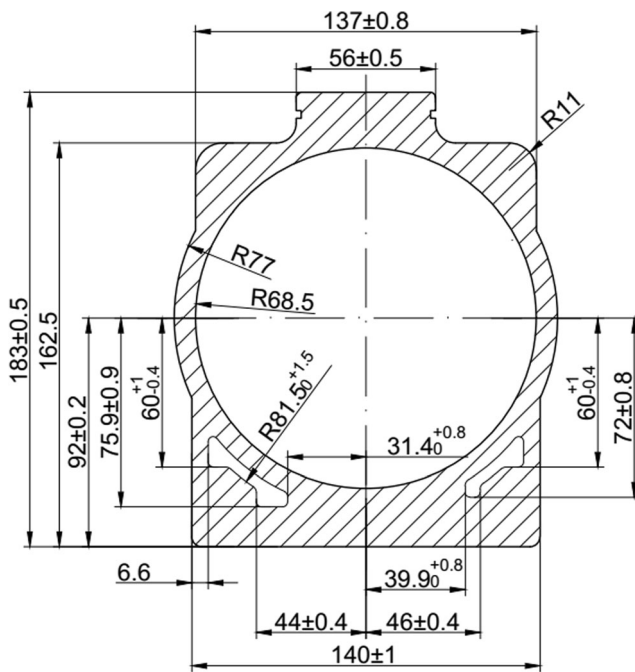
Cross-section shape and dimensions of the profile (mm)
